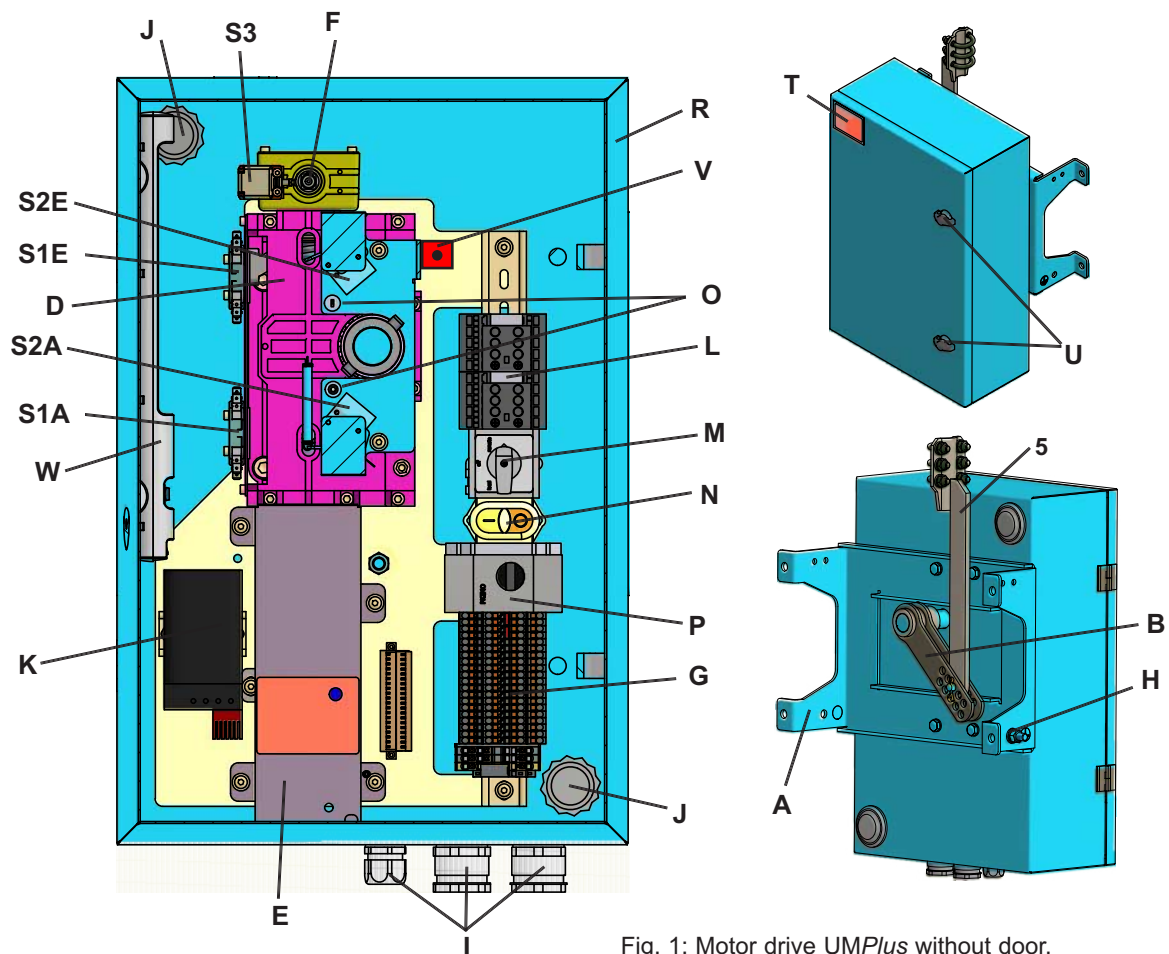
Motor drive UMPlus without door, top right: with door, on the bottom right: reverse side with operating crank
